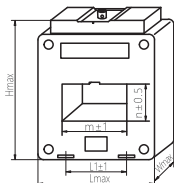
SDH-0.66 60 II ~ 200 II Outline Drawing
